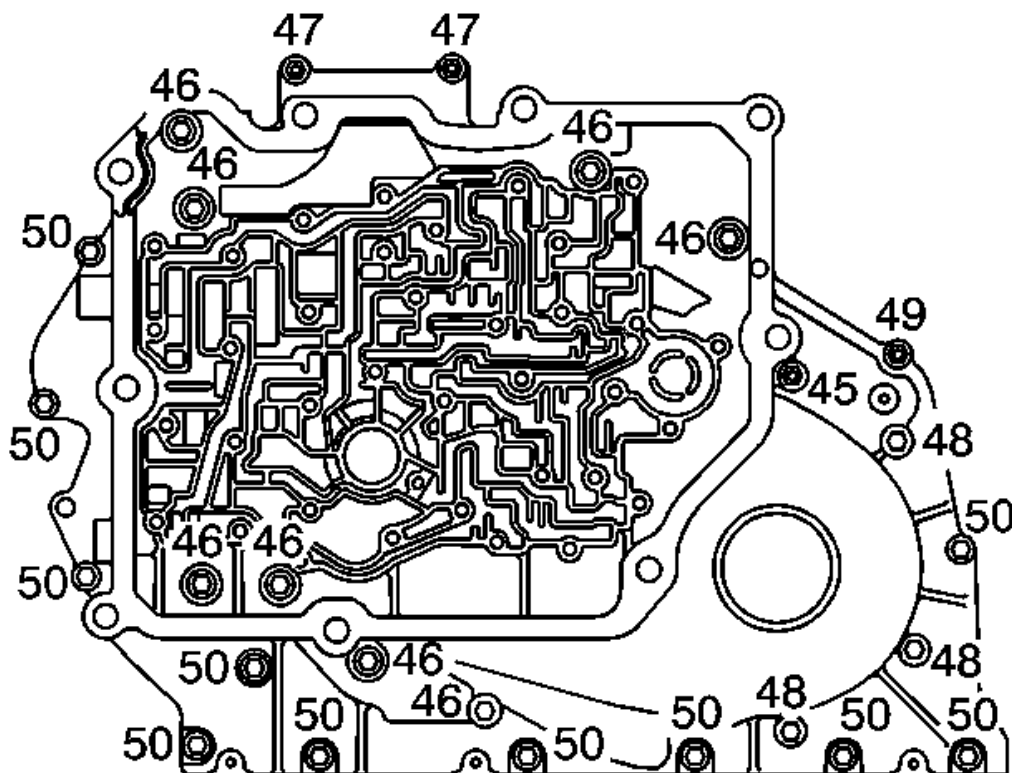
Identifying Case Cover Bolt/Stud Locations
